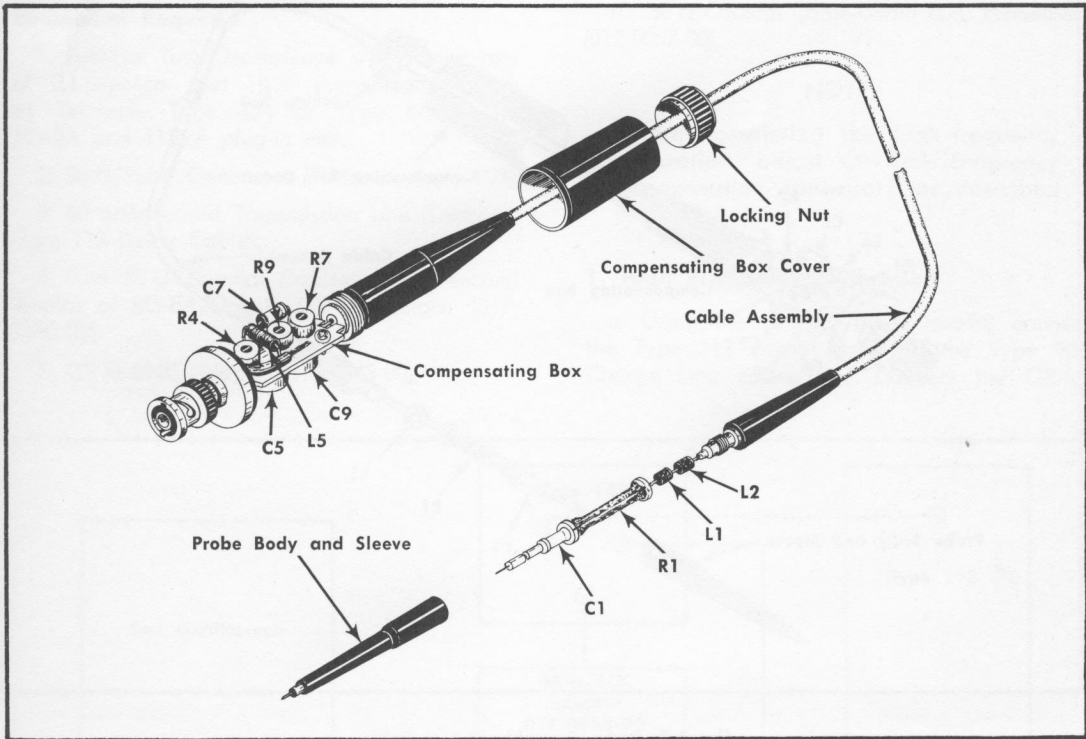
Probe Assembly, 3.5-foot Cable.
